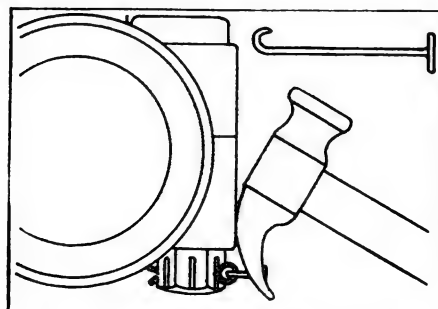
Using a Bent Nail and Hammer for Removing Cotter Pins.
